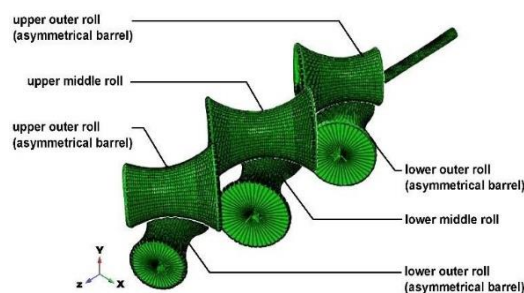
Finite element model and numbering of six-roll machine with asymmetric profiling of the outer rolls as per Fig. 1,b
